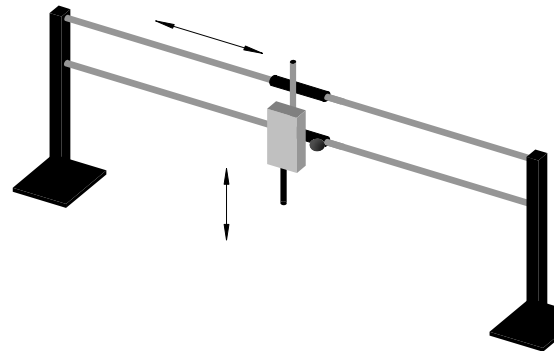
Design Concept for Two-Axis Drill Fixture.
